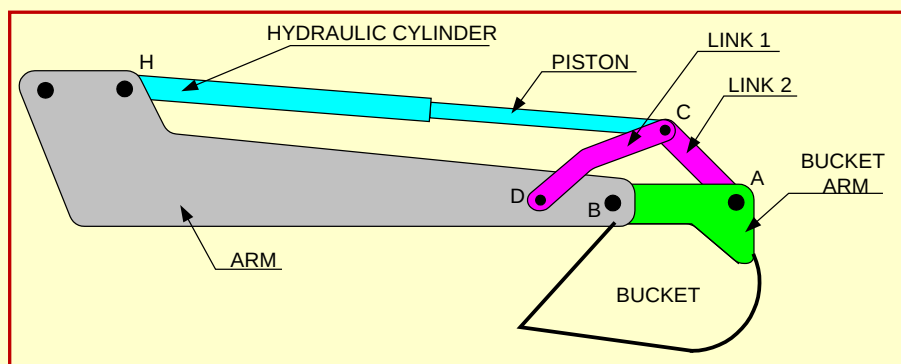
Note the bucket arm and the bucket are welded together.
